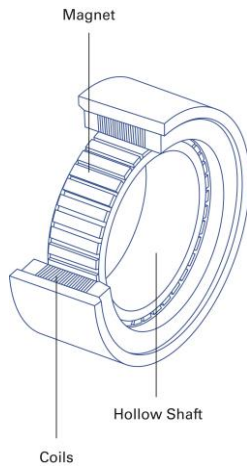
Torque motor design, similar to a wound up linear motor or short BLDC motor.
